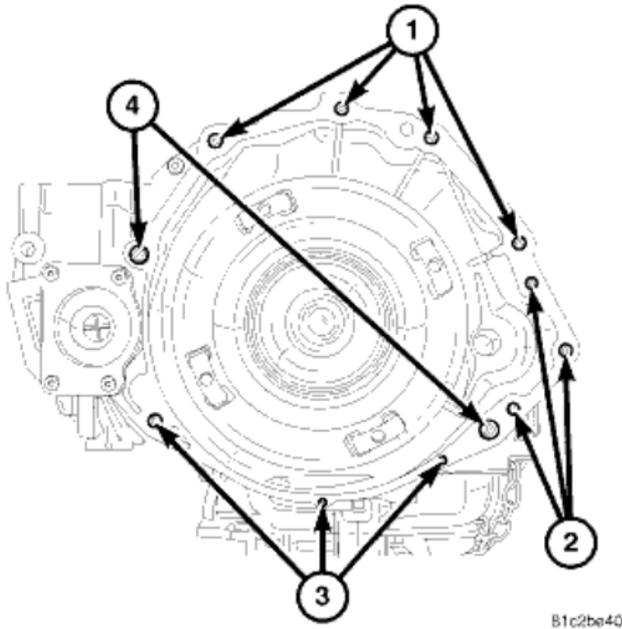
Removing/Installing Bellhousing Upper & Lower Bolts
